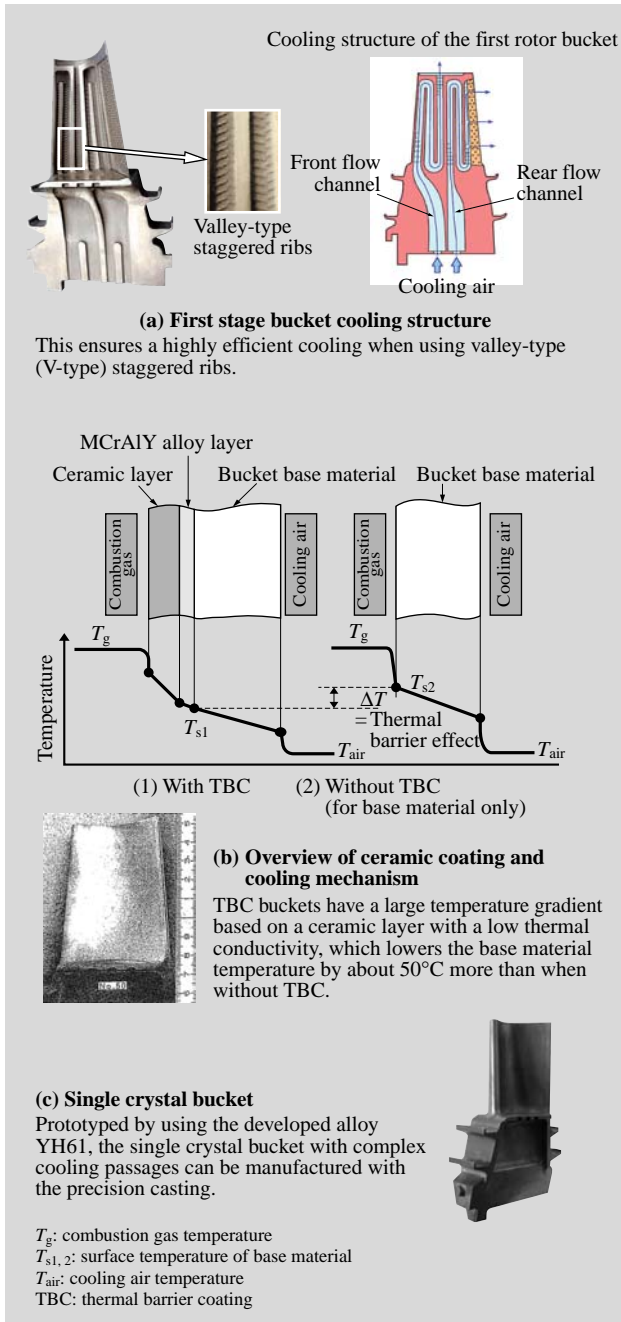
Turbine Technology for H-25 Gas Turbine. These are the technologies used for turbine cooling, coating, and materials of the H-25 gas turbine.
